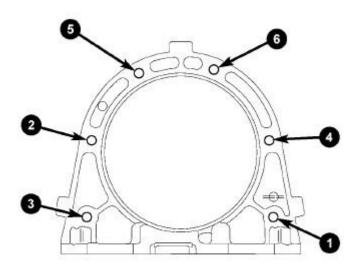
Rear Oil Seal Carrier Courtesy of CHRYSLER LLC
